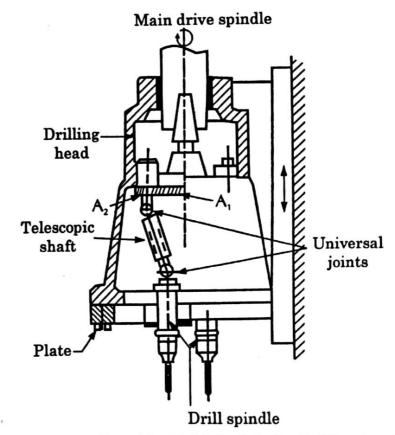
Adjustable Multiple-Spindle Drilling Machine
